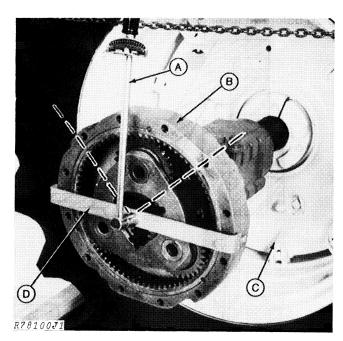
Checking Rolling Drag Torque With Wheel Removed
